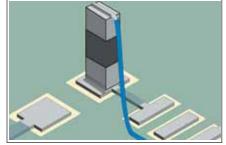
Acceptable Wire soldered to component end, lifted off pad.
